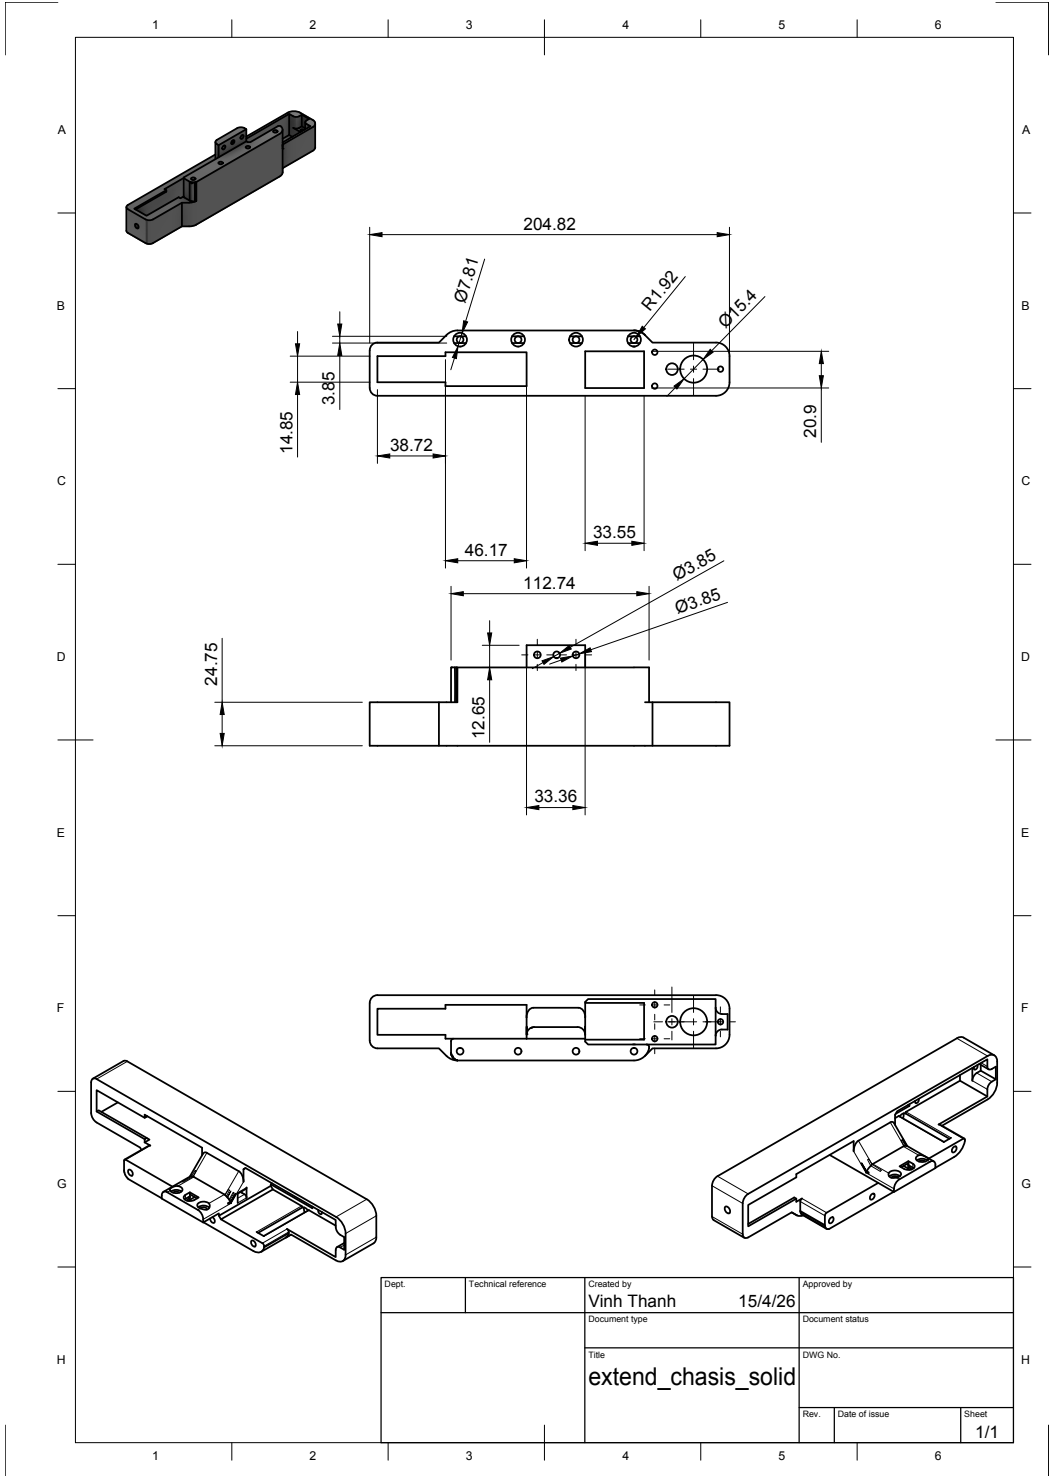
Single motor chassis blueprint for 6V TT gear motor with open surface for motor air cooling
